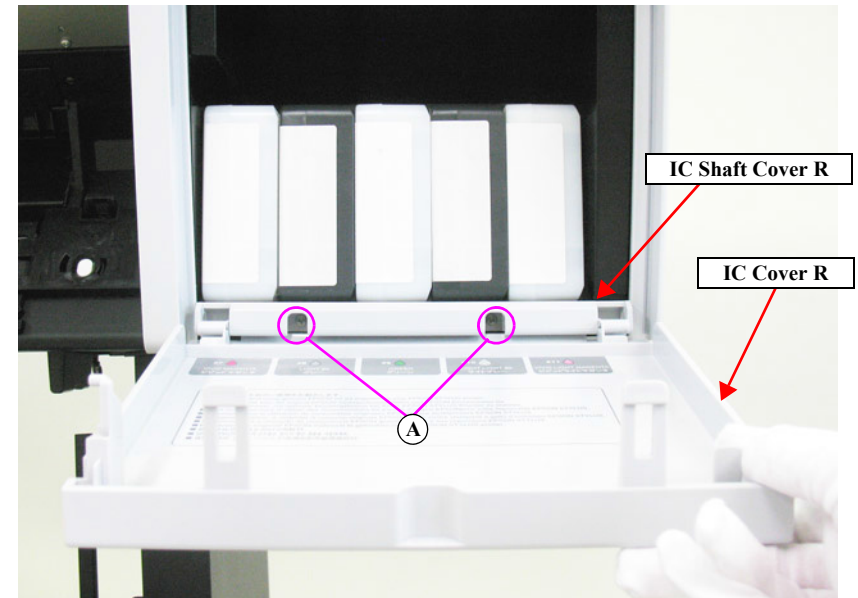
Removing the IC Cover (L/R) & IC Shaft Cover (L/R)
